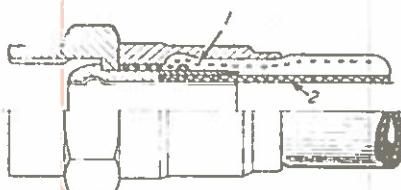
shows a fitting where both the inner hose lining and braid are gripped compressively. Hose fittings of this type have the advantage that they require no special tools and can be assembled by hand, as well as being *re-usable*. They enable a hose to be made up to length on the job, instead of having to work to stock lengths of hose with integral end fittings. Some designs of *re-usable* hose fittings, however, demand the use of an arbor press to complete assembly.
